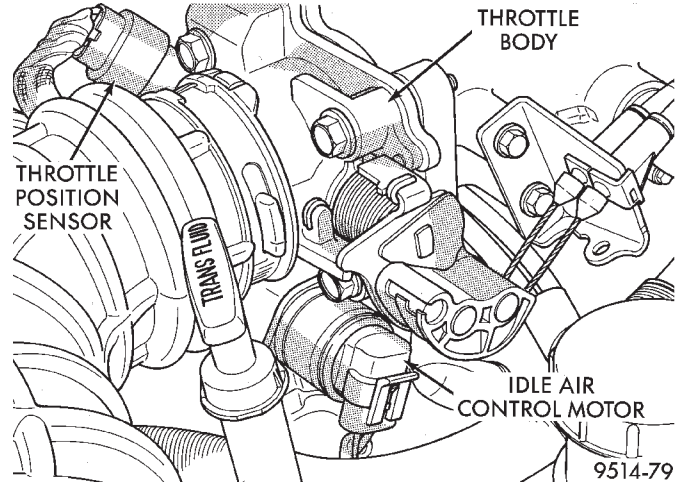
Idle Air Control Motor Air Bypass Passage—2.5L
